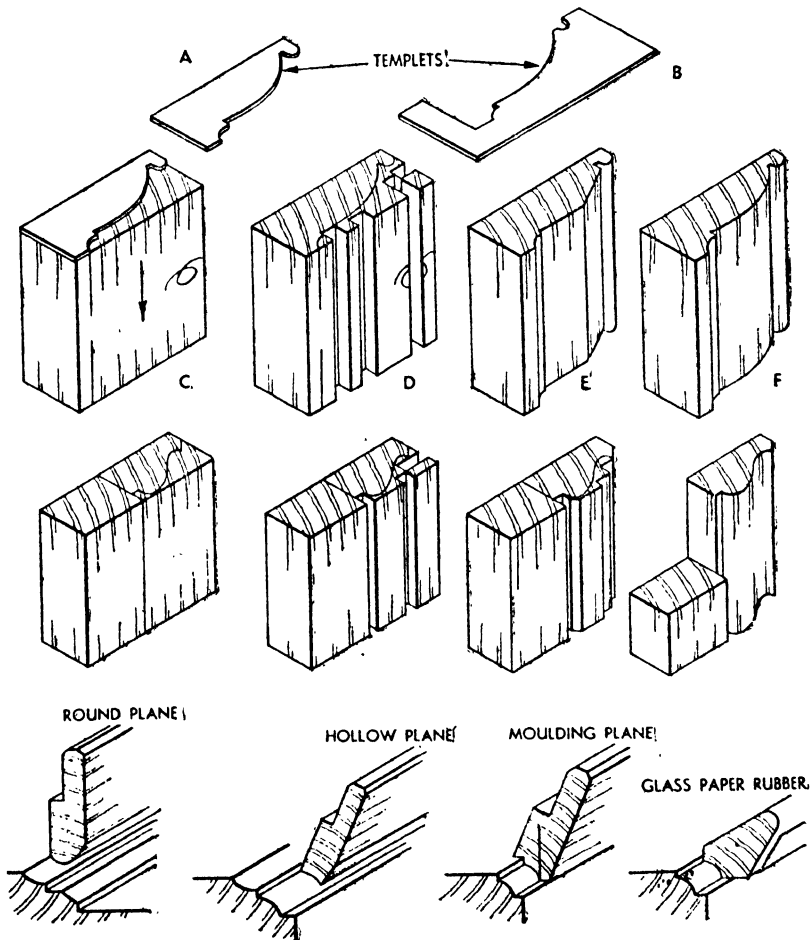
Detailed procedure in preparing moulding by hand methods; C to F show the various stages. Small mouldings should be stuck on the edge of a wide board.
